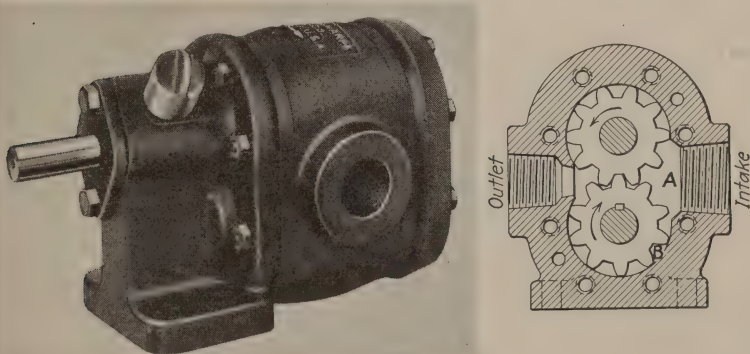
Gear pump. (Courtesy of Brown & Sharpe Manufacturing Company.)
